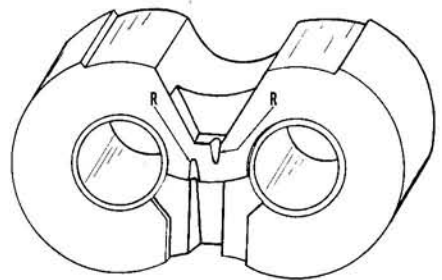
On early bearings, front and rear bearings differ due to position or run-out slots (R). Rear bearing is shown. Latest bearings do not have the run-out slots and both bearings are alike.
